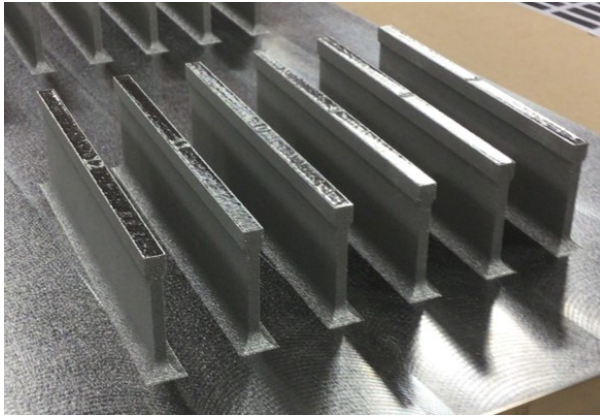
L-PBF printed coupons used for electron beam weld development
